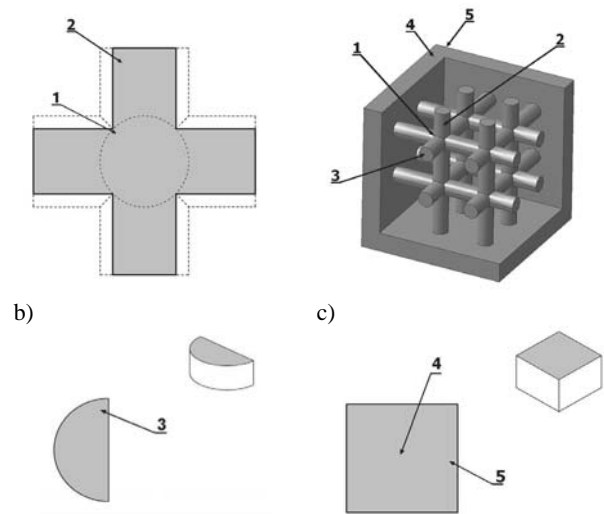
Typical regions in which author compared microstructure: 1 - skeleton node corner; 2 - longitudinal section; 3 - cross-section; 4 - central elements of corner wall which closed the skeleton; 5 - external surface of corner wall which closed the skeleton [13]
